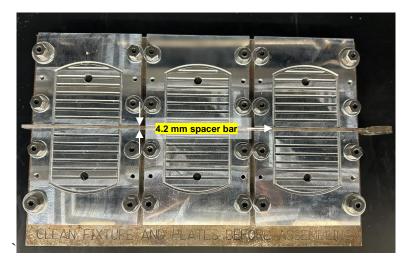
Assembly Jig, Base Plates, and Spacer Bar
